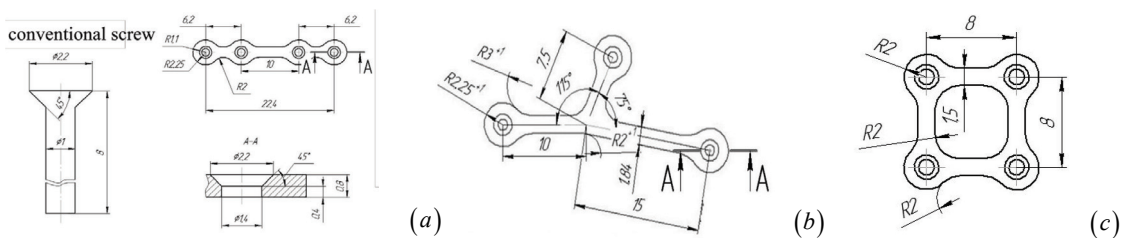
The design and dimensions of the plates: (a) Straight plate with a cross-section in the screw area. (b) Y-plate.
